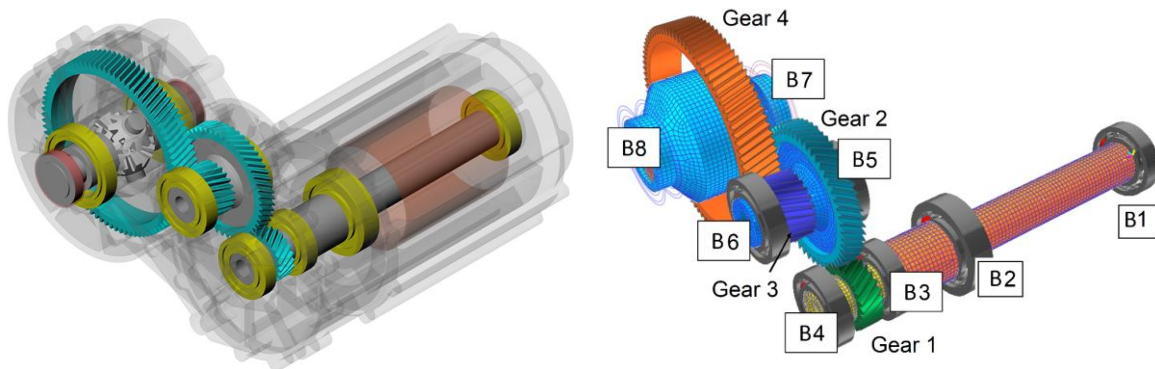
Two-stage gearbox model layout (left) and bearings and gears numbering (right)
